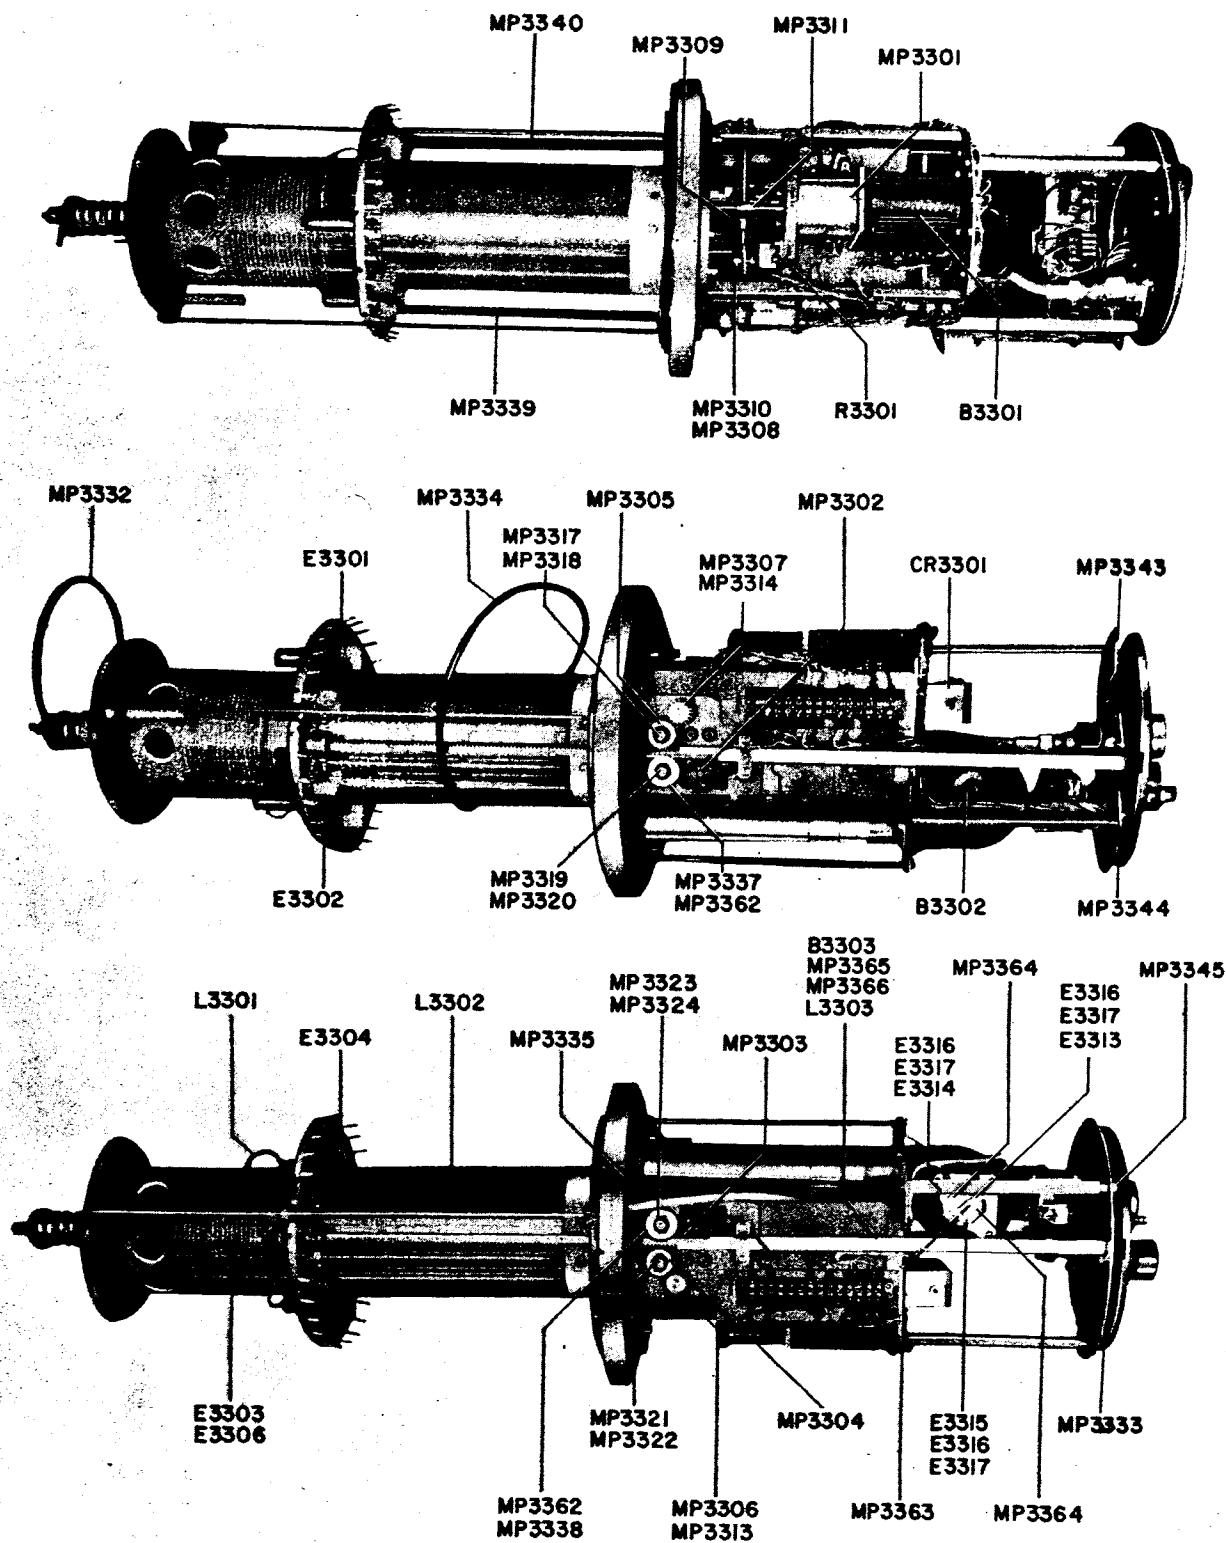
Radi Frequency Tuner TN-345/WRT-1, Location of Internal Mechanical Parts
